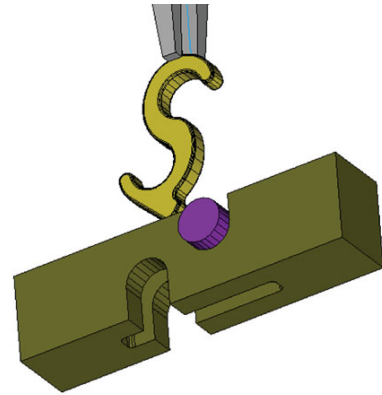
PULL THE CONTACT OUT OF THE CONTACTOR USING A NON-METALLIC TWEEZERS.
